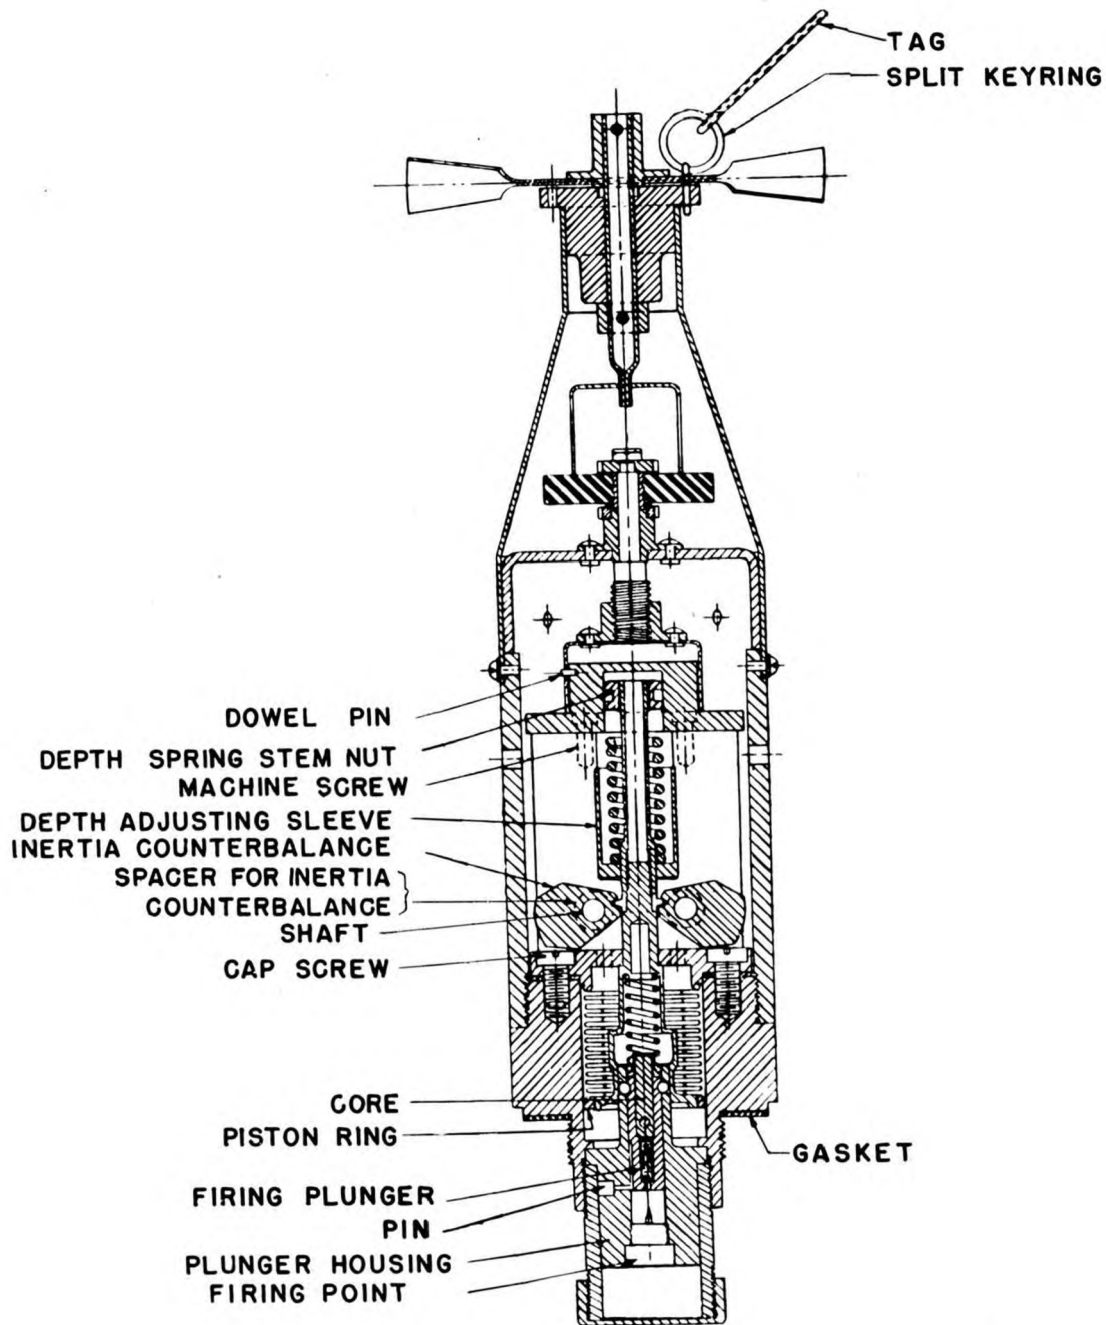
ASSEMBLY OF AN-MK. 230 BOMB FUZE, UNARMED POSITION.
